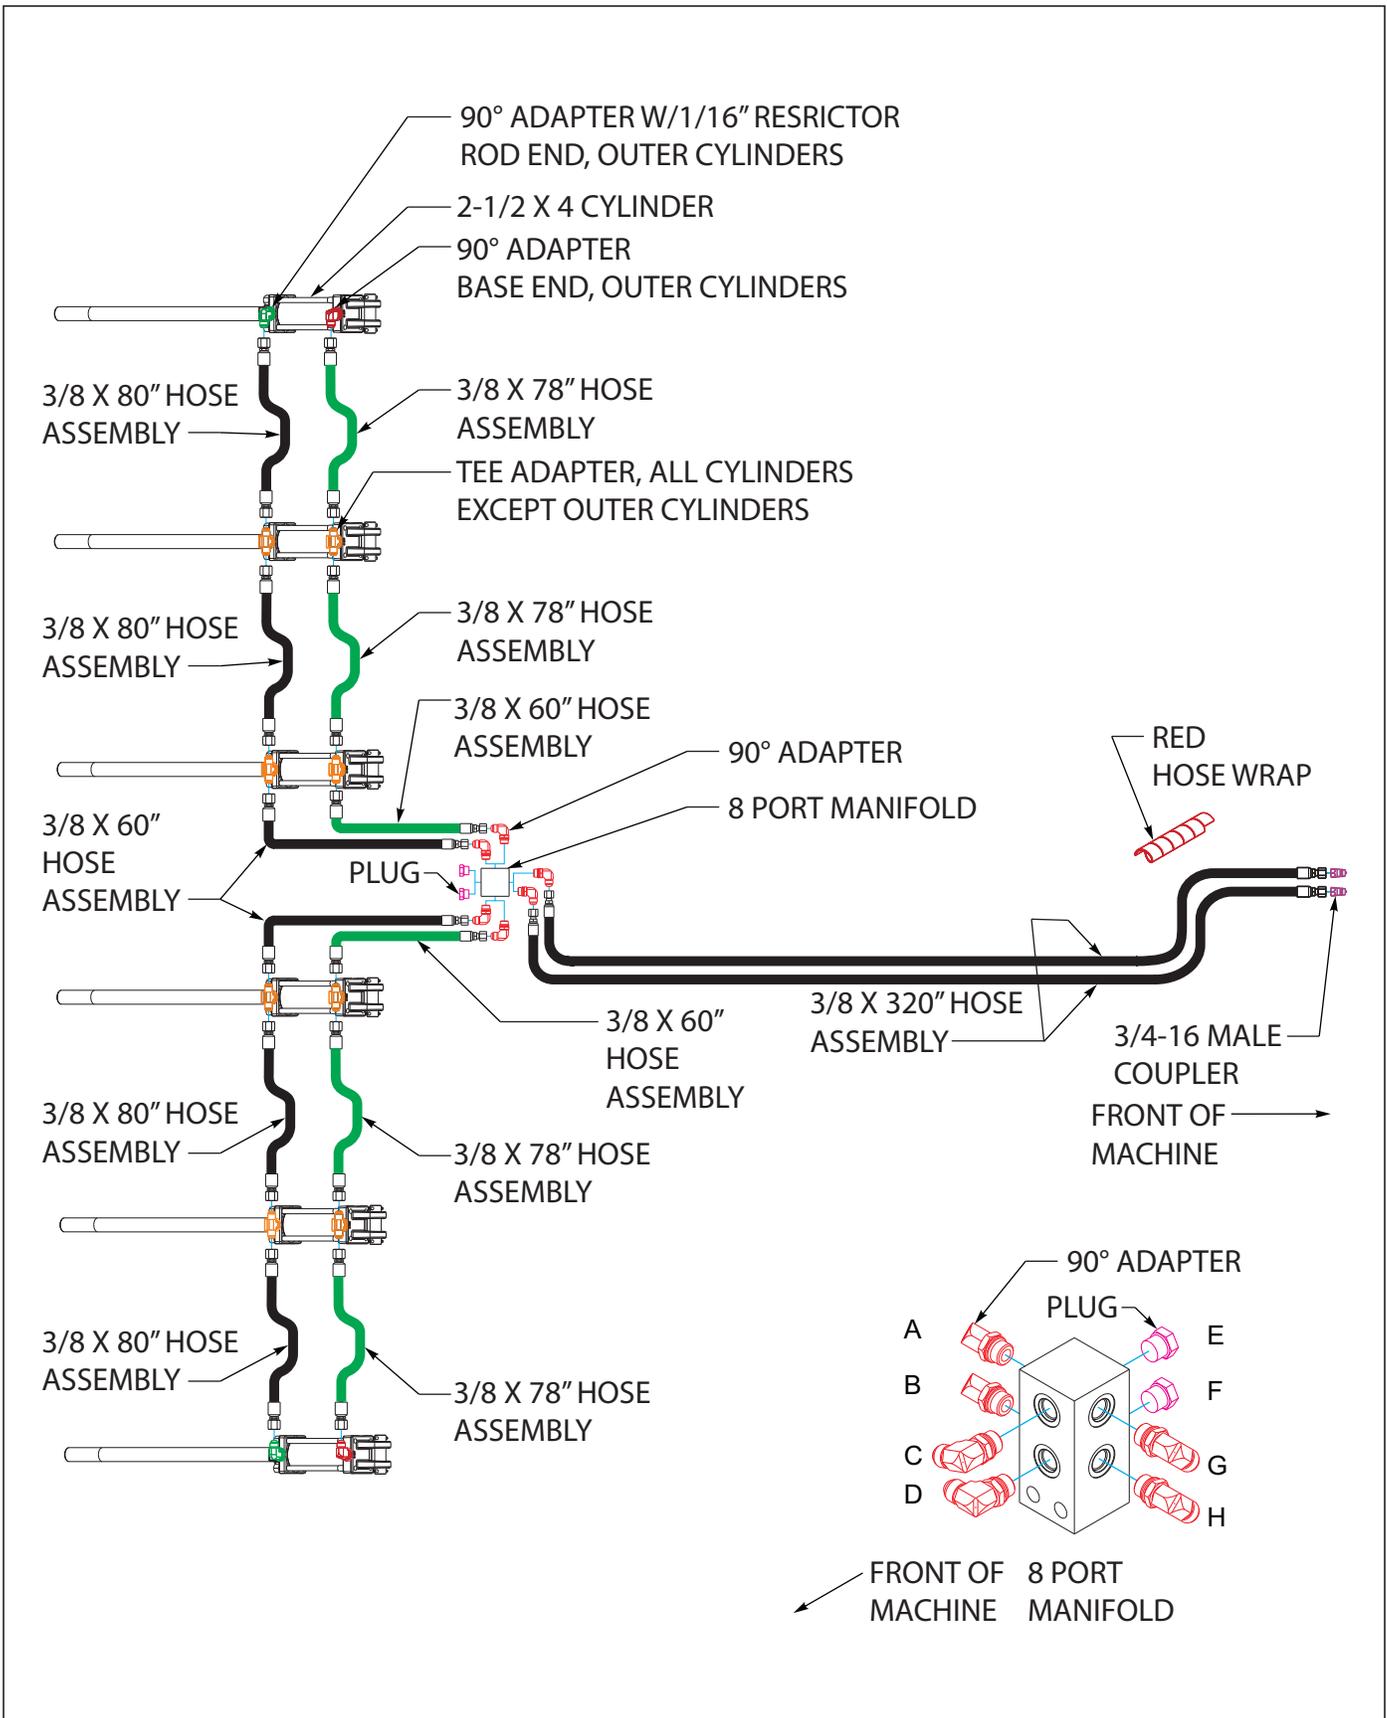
Hydraulic Bracket & Treader Assembly Hydraulic
